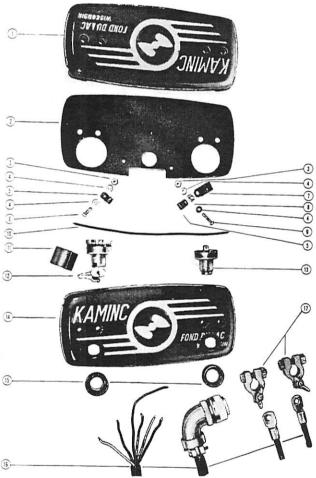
Electric Remote Control Assembly Electric Remote Control Assembly
